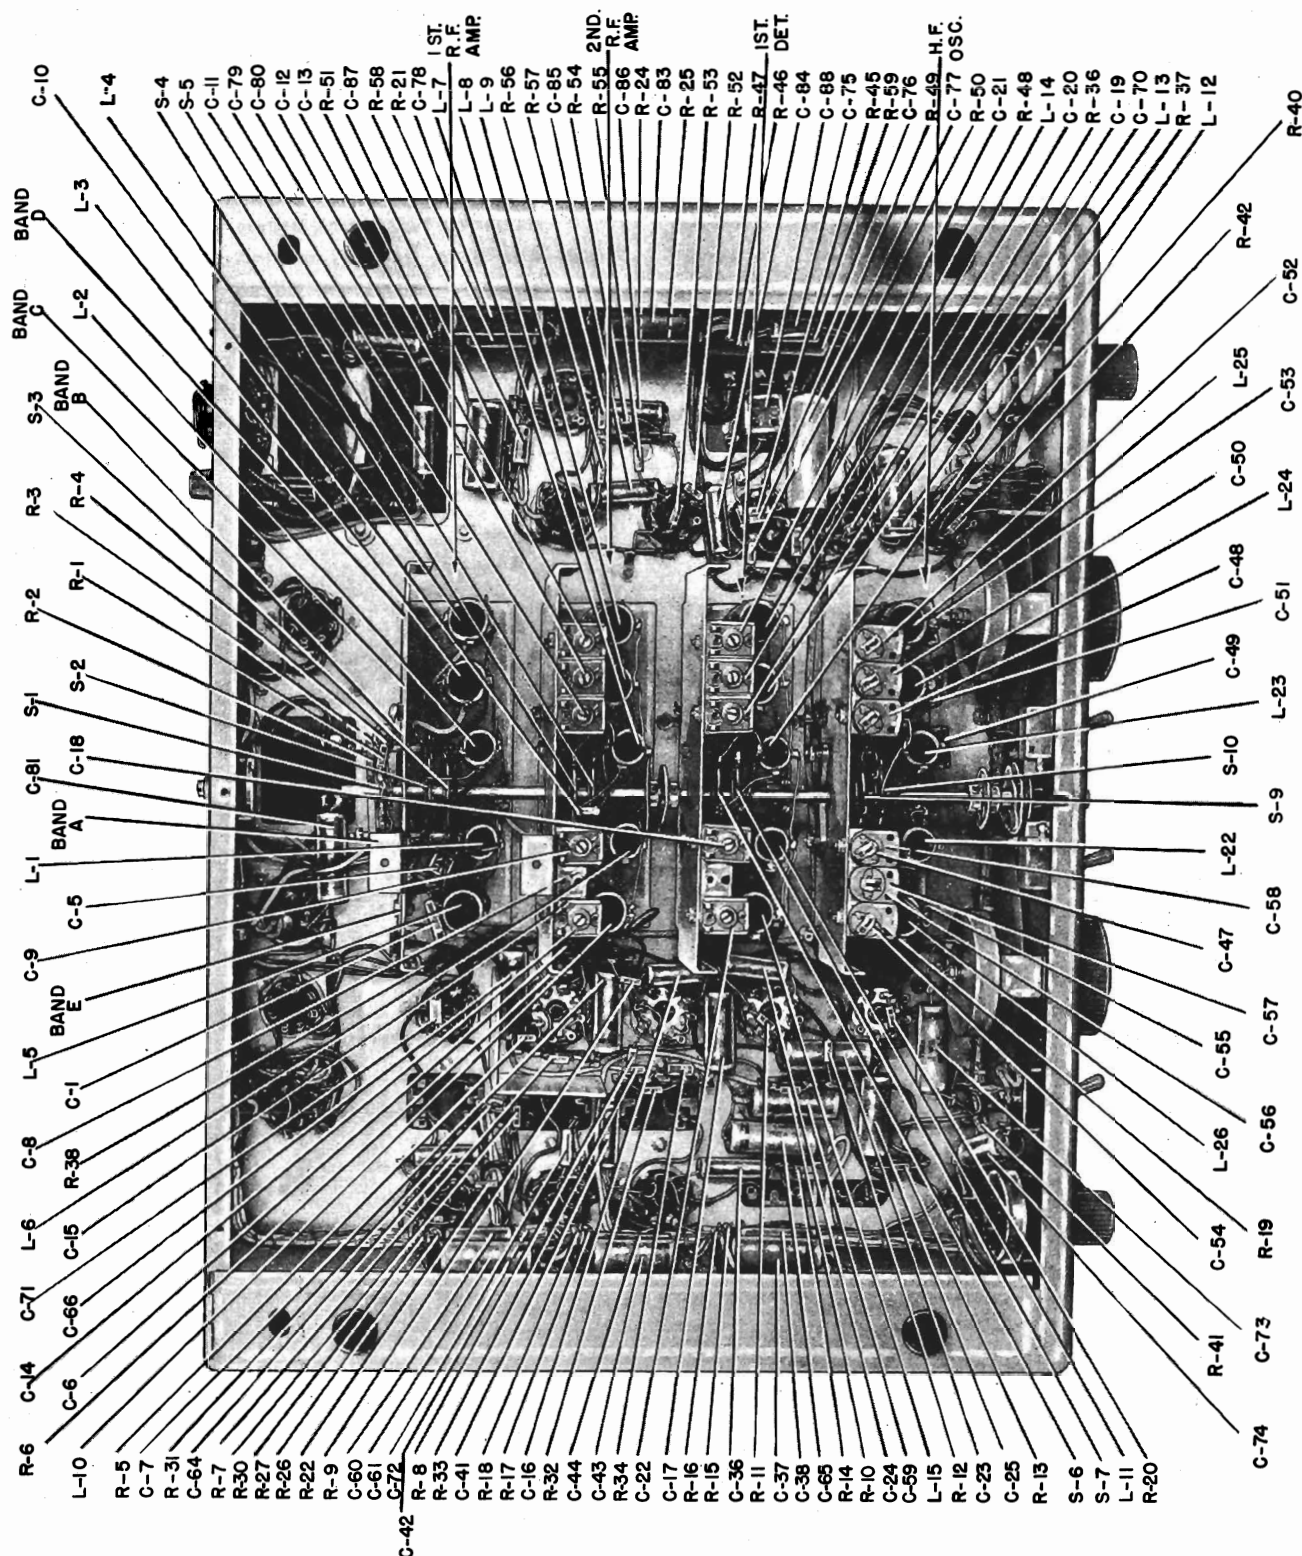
Bottom View of Receiver (Coil Compartment Side Plates Removed)
